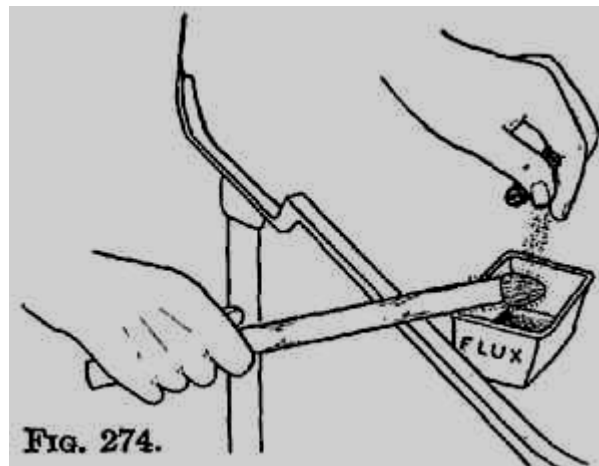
Apply welding flux with irons at a red heat, and just before the welding heat is taken.
